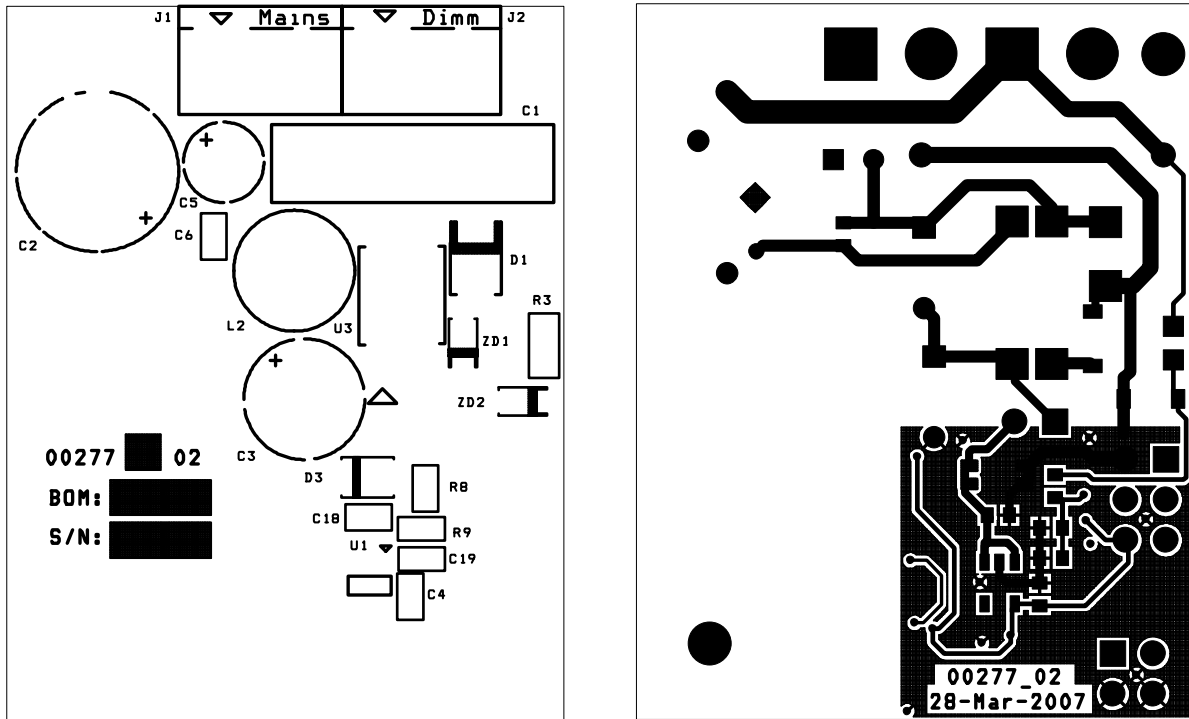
Intelligent Outlet Ver.2, Parts Placement and PCB Layout, Bottom Side
